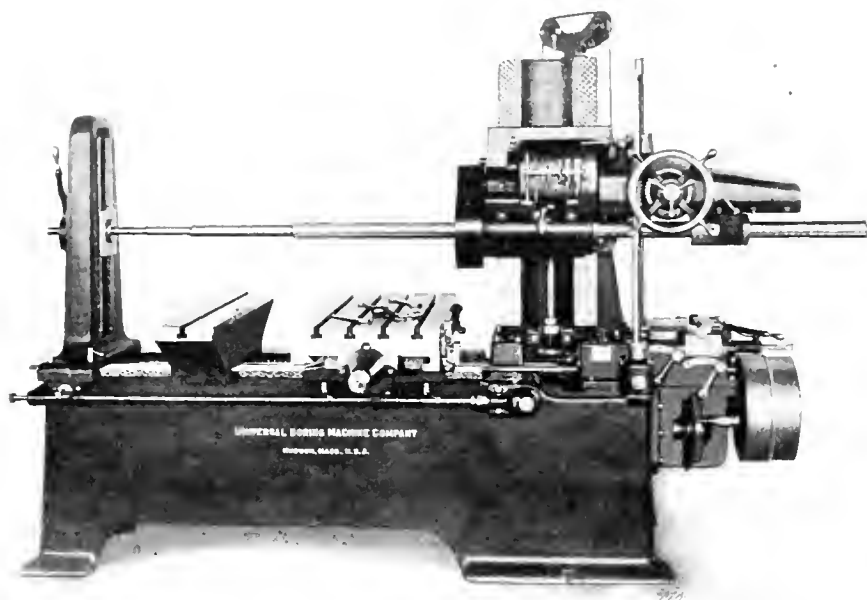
The Universal Boring Machine Co.'s Universal Boring, Milling, and Drilling Machine.
